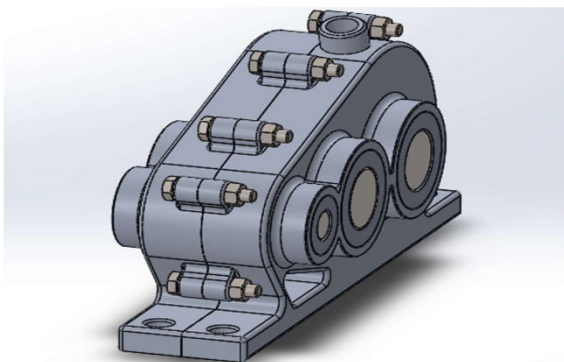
3D model of Gearbox Casing – Outer Side
